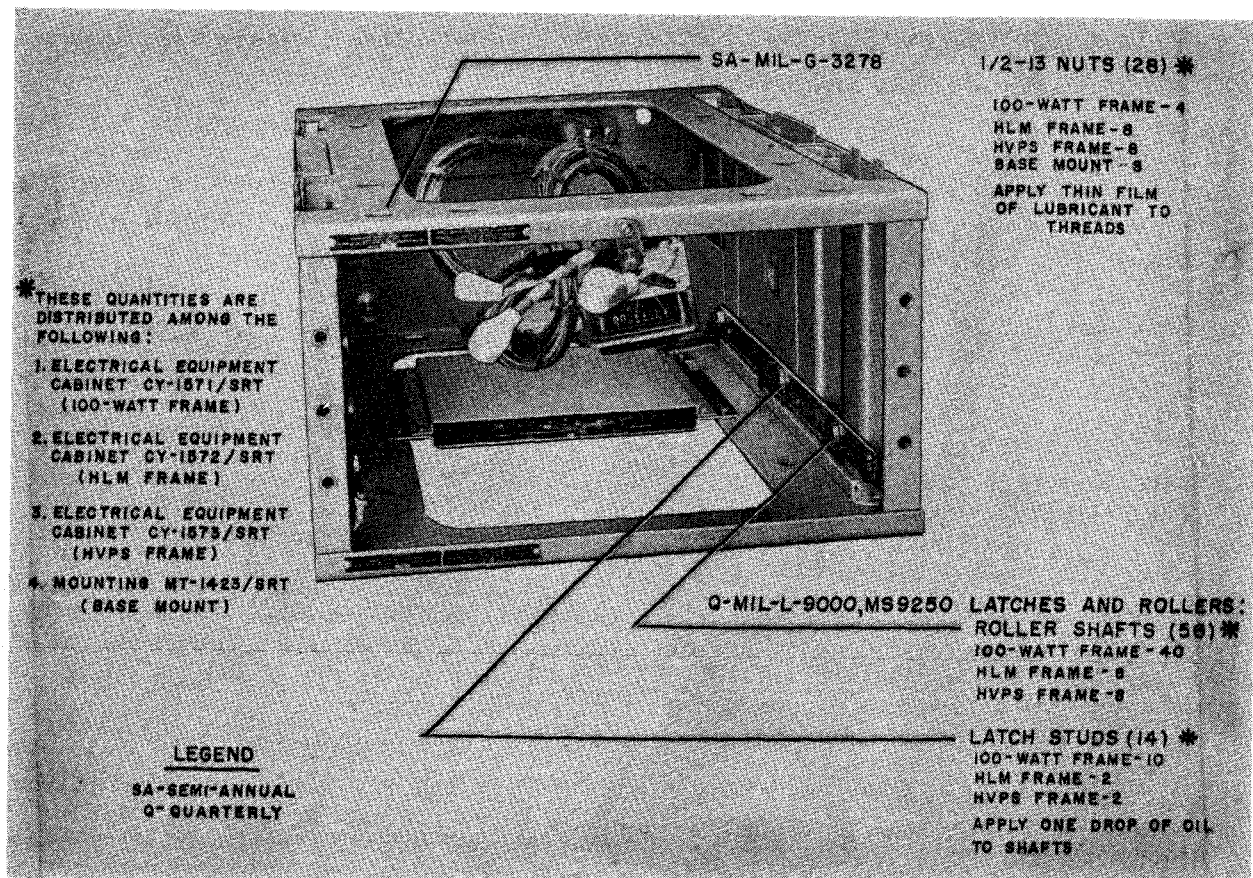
Electrical Equipment Cabinet and Base Mount Latches, Rollers and Nuts, Lubrication
